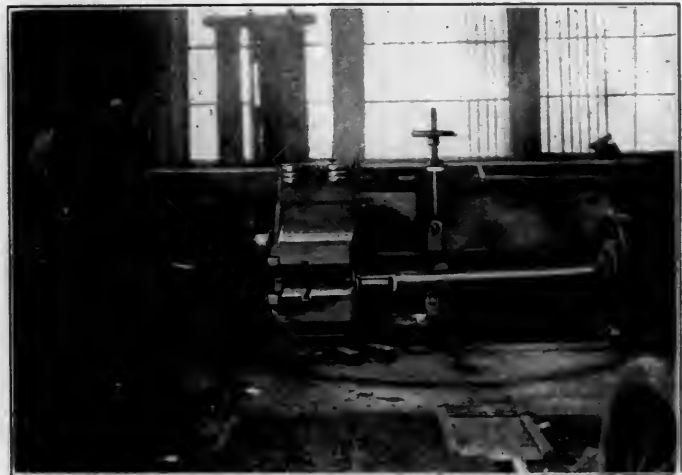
Dismounting Press Showing Scrapped Wheel Ready for Lifting
